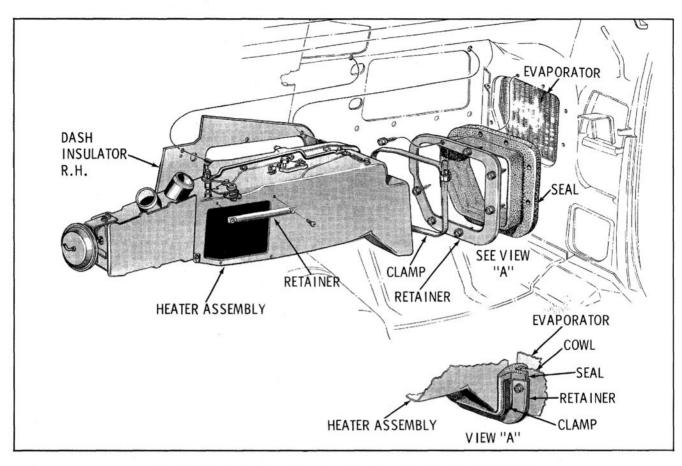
Heater Case Assembly (33 - 34 - 35 - 36 - 38 & 39 Series)
